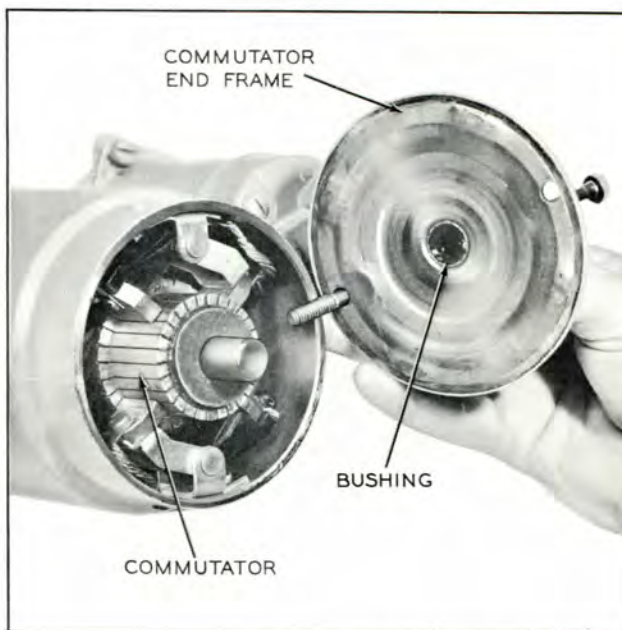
End Frame Bushing Lubrication-Typical Starter
